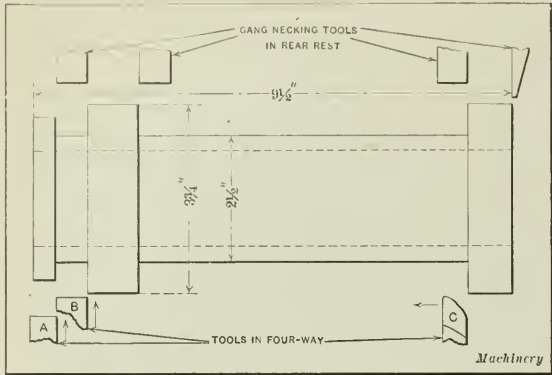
Tool Diagram for First Lathe Operations on Double Bevel Pinion
